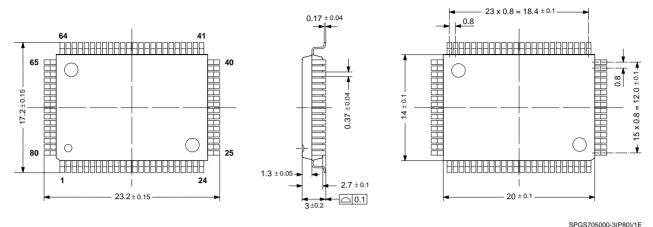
80-Pin Plastic Quad Flat Pack (PQFP80) Weight approximately 1.61 g Dimensions in mm
